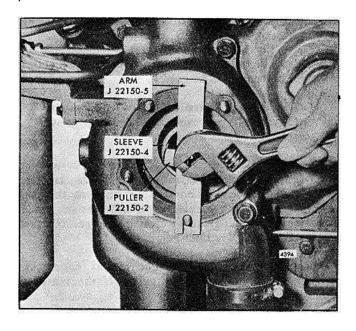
Removing Water Seal from Pump using Tool Set J 22150-B
